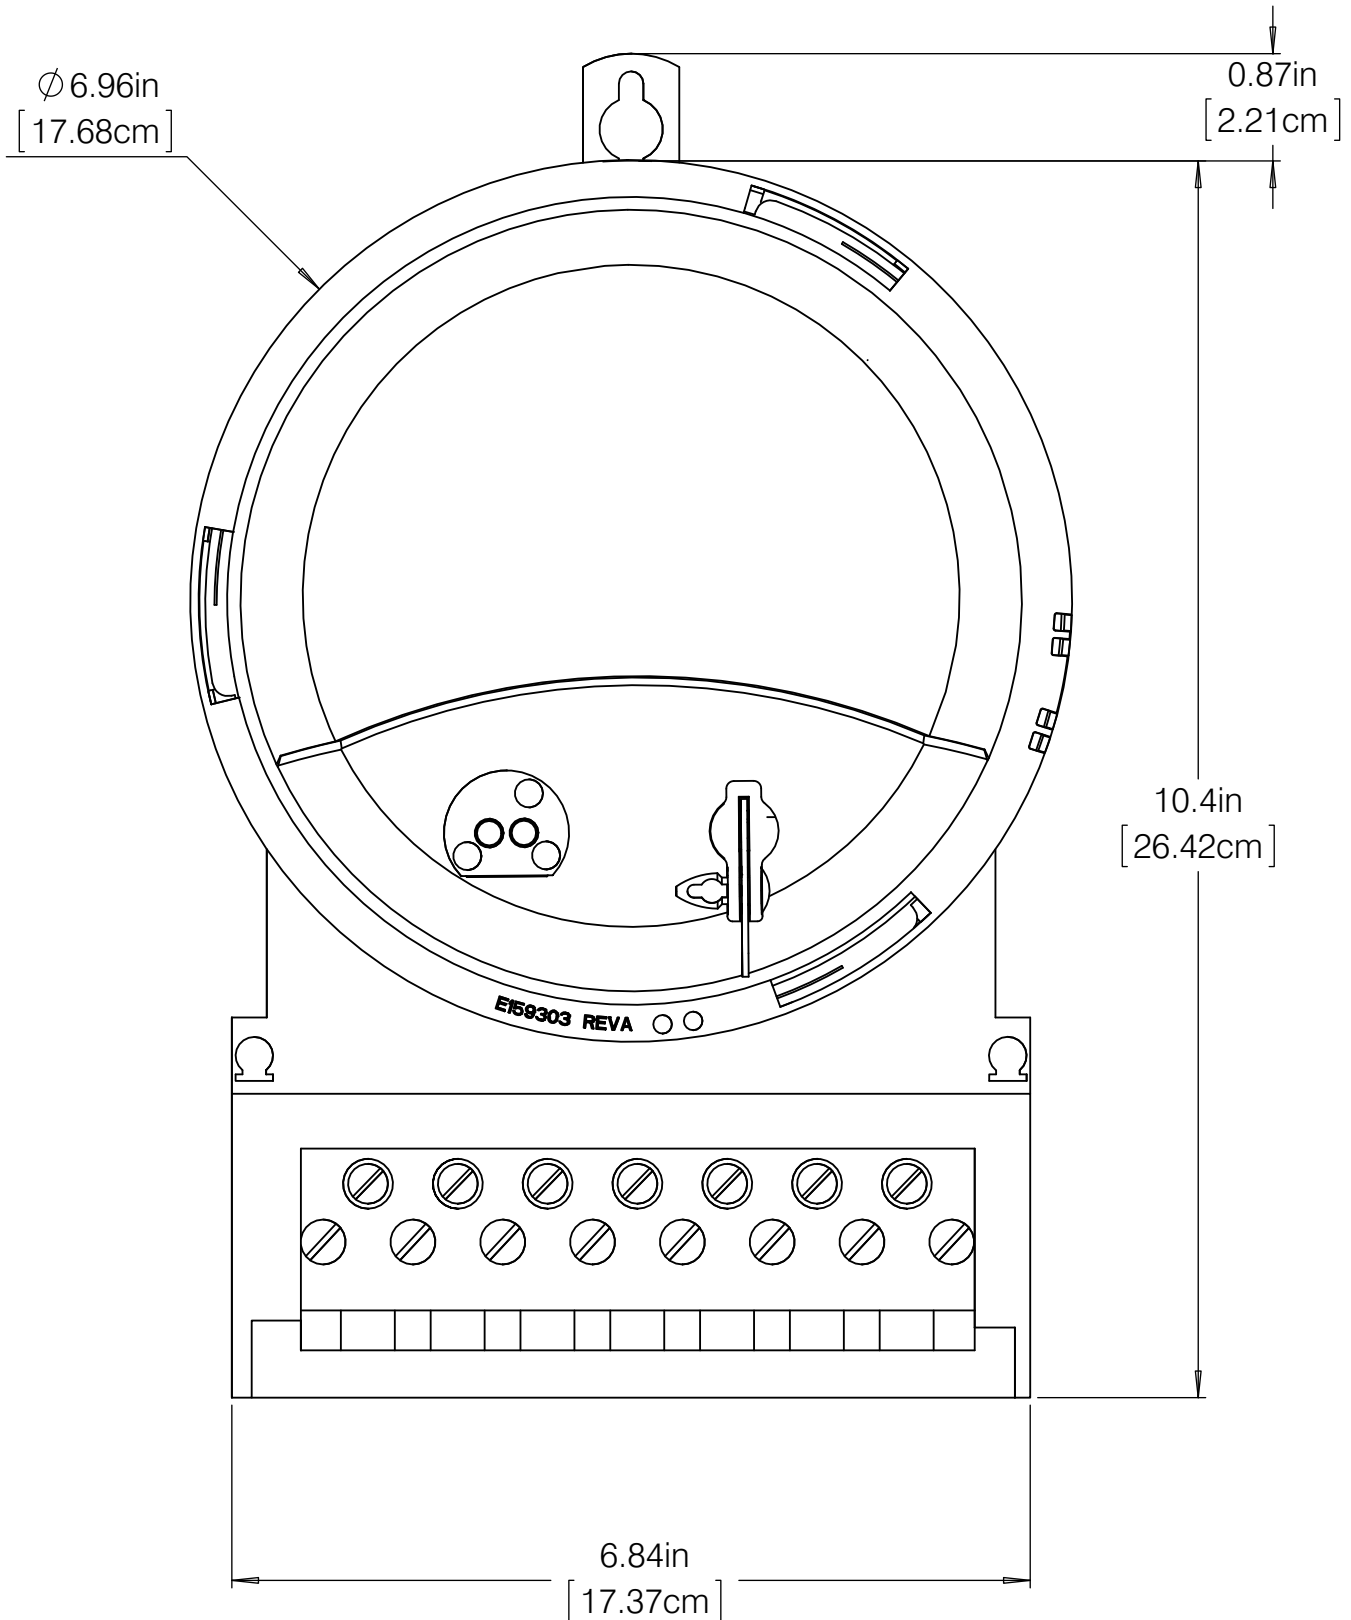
Socket Meter Mounted in S to A-Base Adapter Front Dimensions
